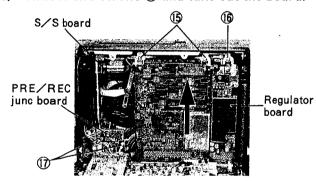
Removal of S/S, Regulator, PRE/REC junc board
